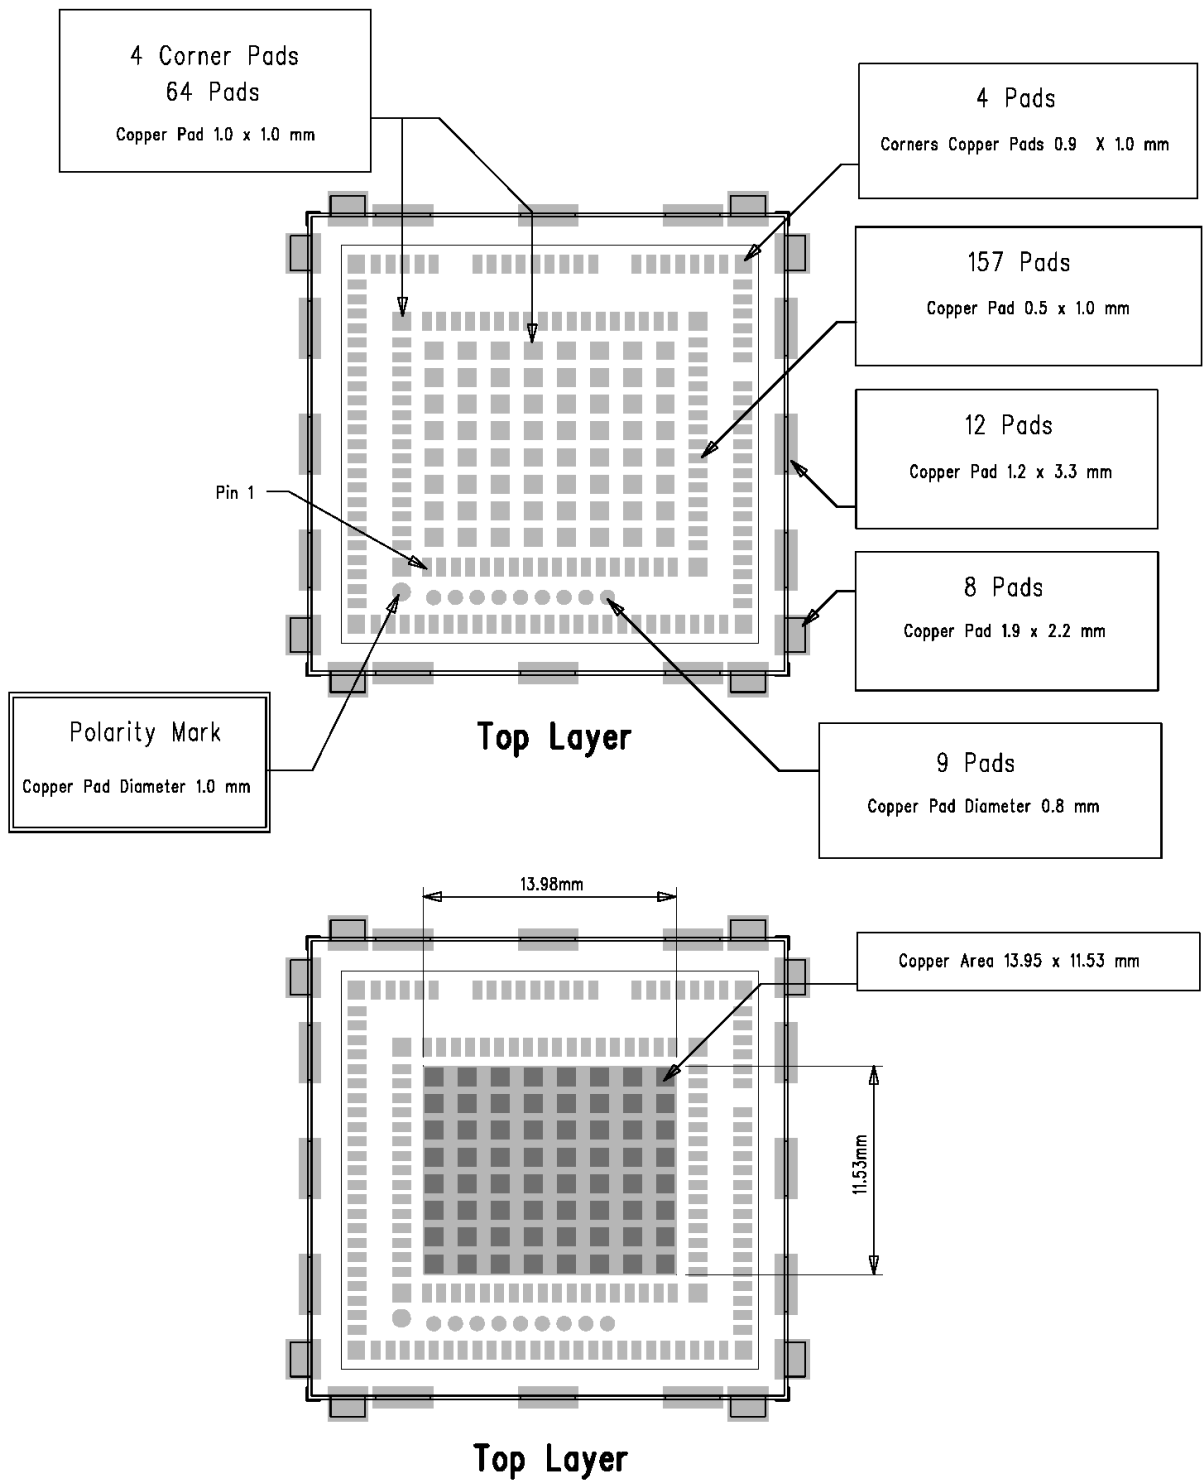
Recommended WP and RC76 Series Snap-in Socket Footprint – Copper Layout
